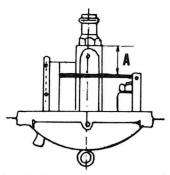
Float level (A) is adjusted by bending portion of float arm that contacts fuel valve assembly (12—Fig. \$-14-1).
